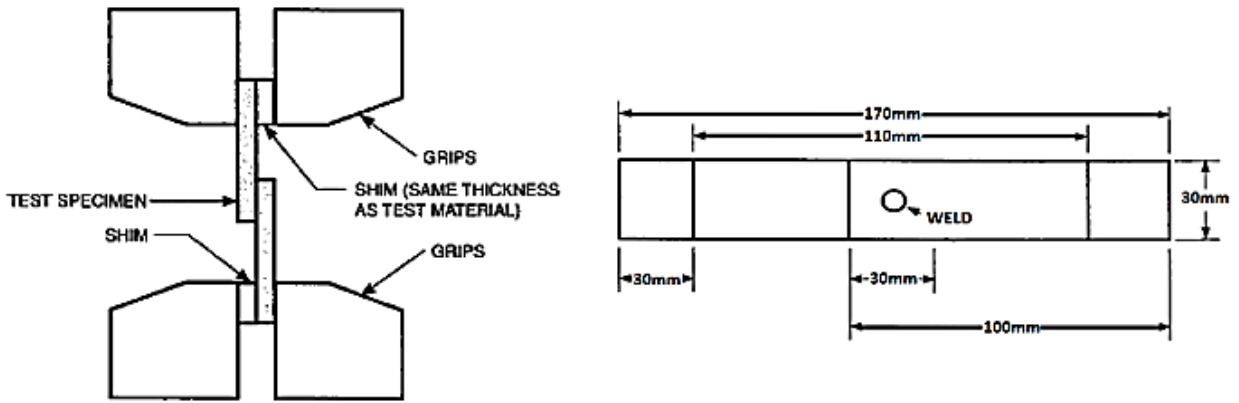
Tensile shear test setup: schematics and specimen layout [17, 18]
